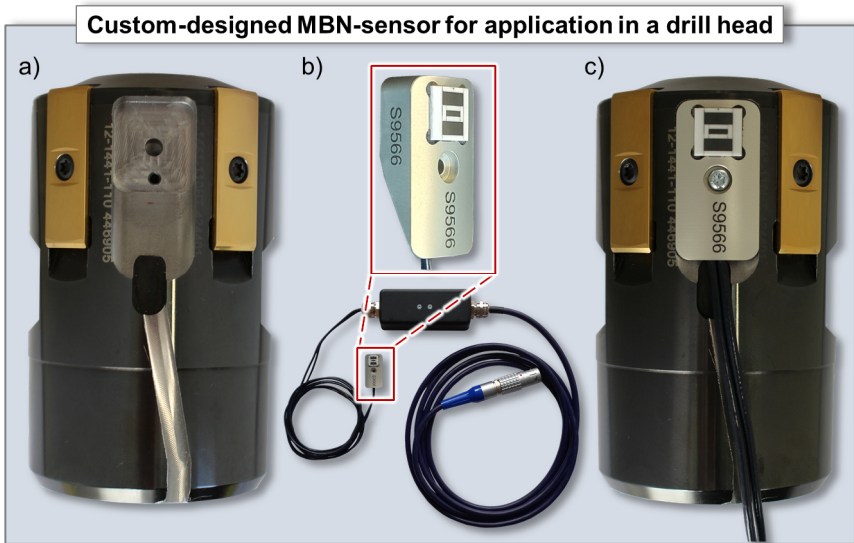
Mounting of a custom-designed MBN-sensor in a BTA drill head: a) BTA drill head with a milled pocket, a bore with a thread for fixing the sensor, and a groove for the positioning of the sensor cable, b) custom-designed miniature sensor for the Rollscan 350 with an external amplification, c) sensor mounted inside the BTA drill head
